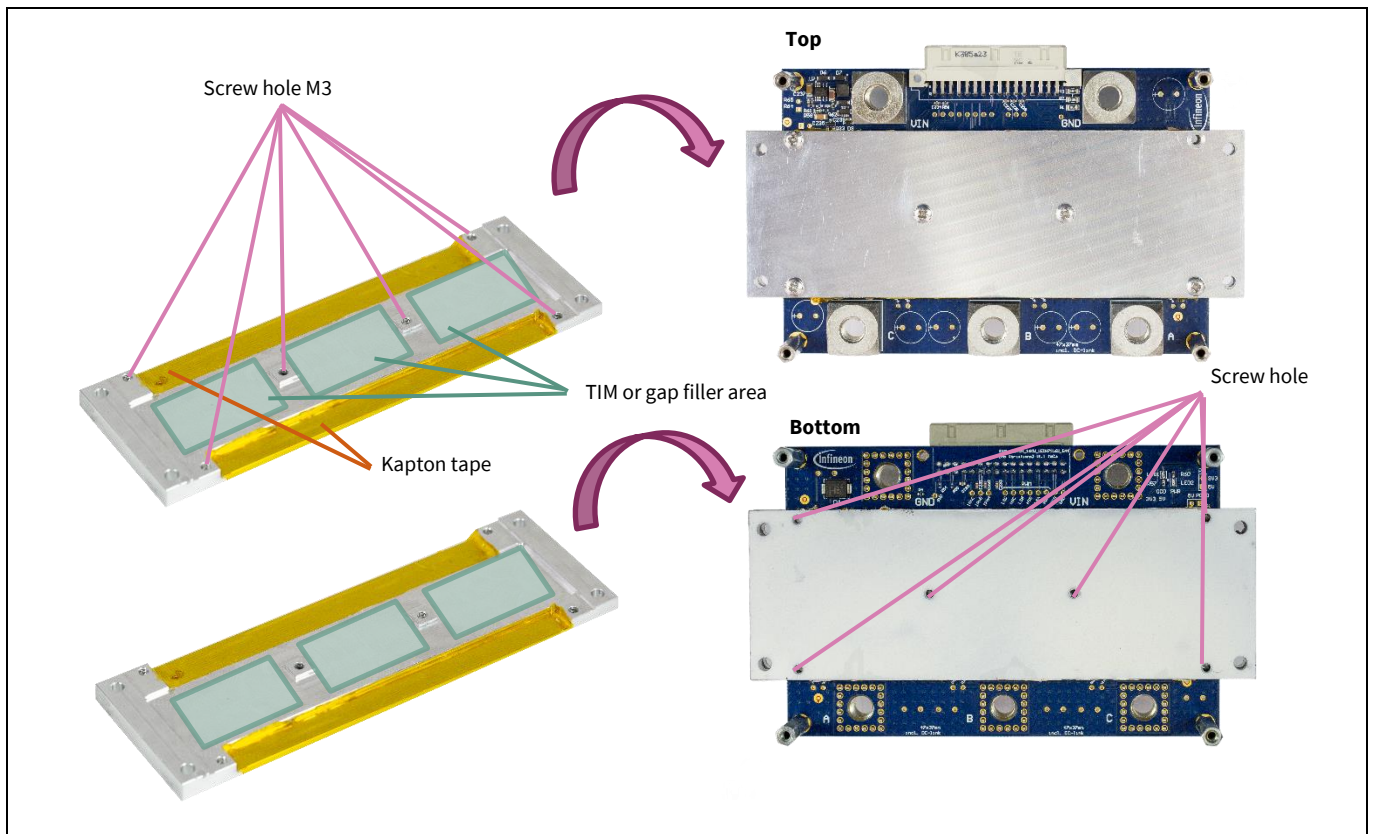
Left: Placement of TIM across CoolGaN™ half-bridge and Kapton tape to avoid a short on DC link caps; right: Fully assembled top and bottom evaluation board with heat spreader
